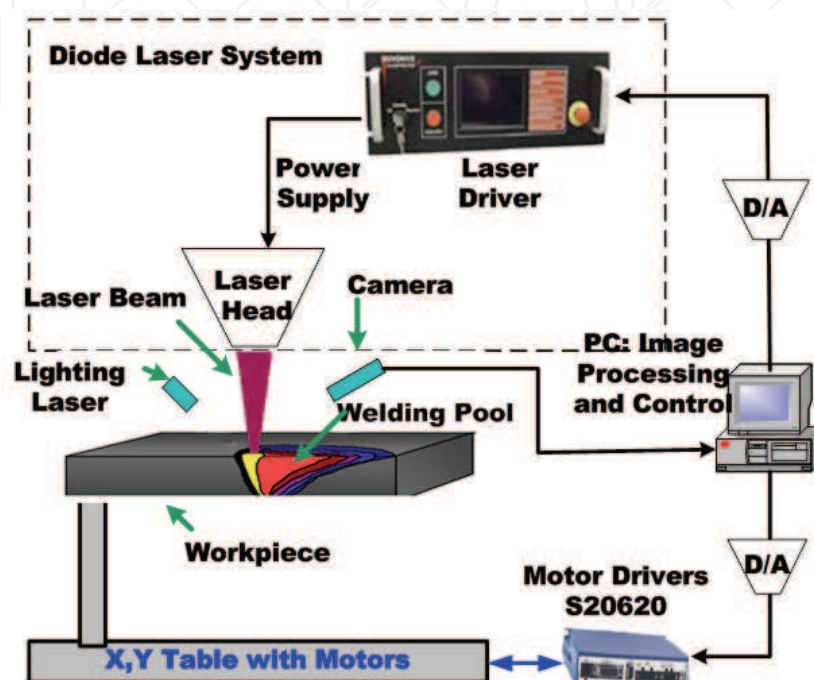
Standard vision sensor based automatic diode laser welding system
